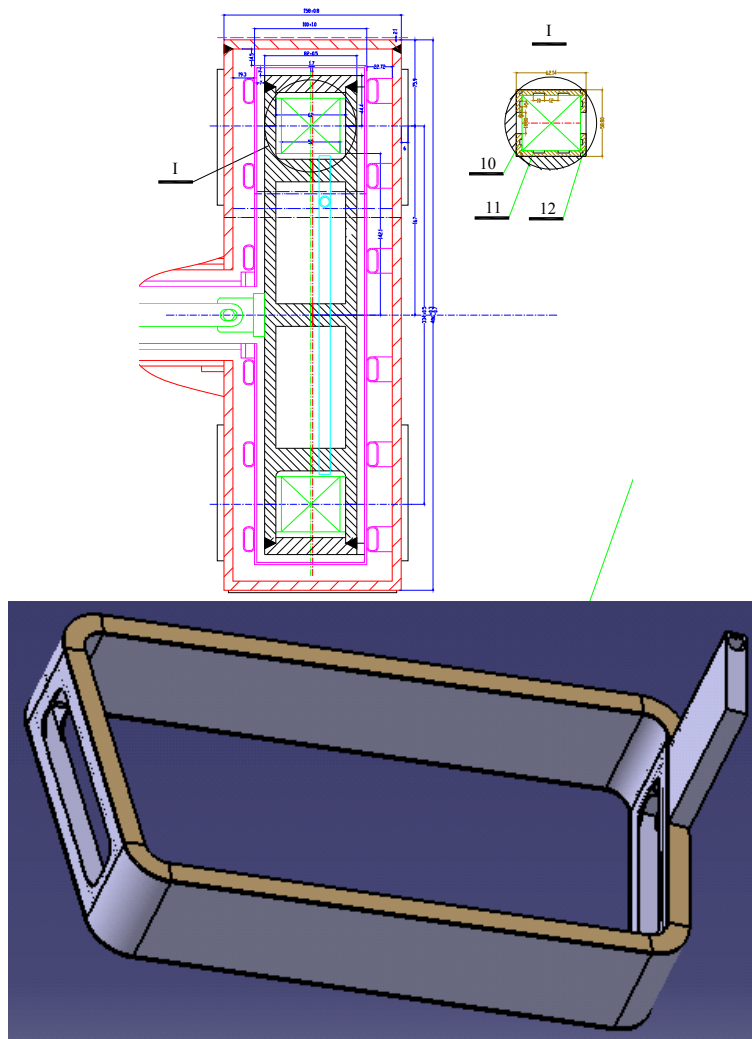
Cross-section (upper panel) and top view (lower panel) of the coil casing.
